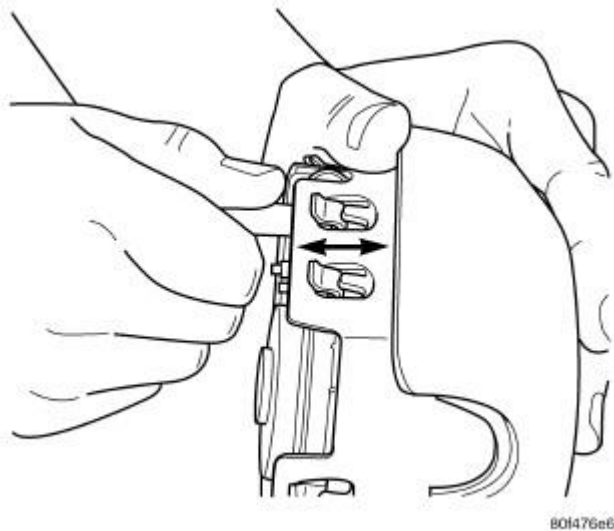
Secure Driver Airbag Cover Latch Hooks
